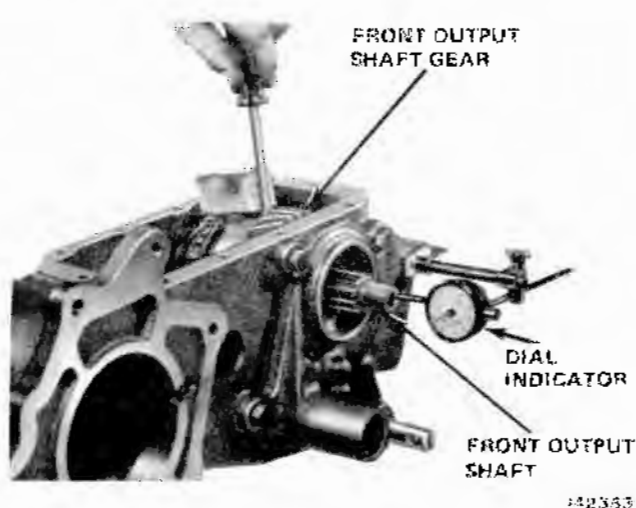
Checking Output Shaft Bearing Adjustment
